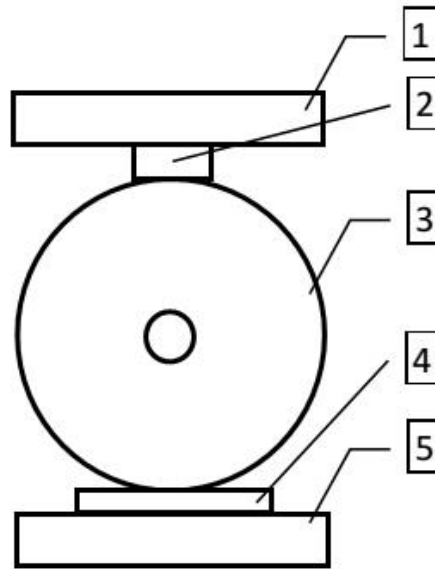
Disk loading scheme: 1&5 - press plates, 2 – hard alloy insert, 3 – disc, 4 - mild steel insert.
